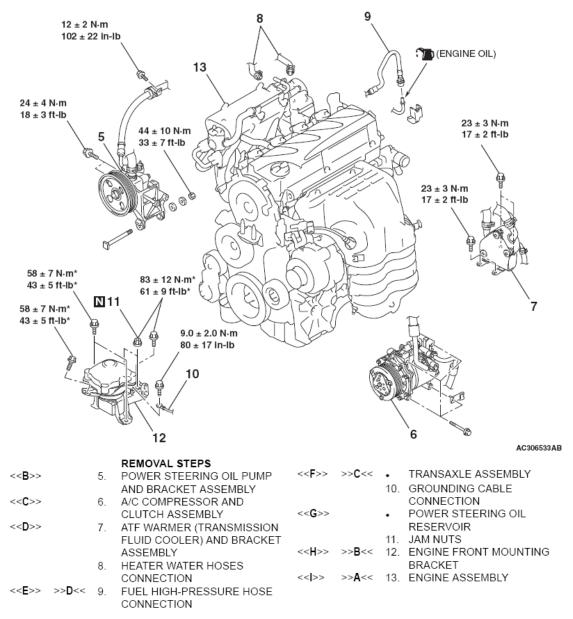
Engine Bracket, Power Steering Pump, A/C Compressor & ATF Warmer With Torque Specifications
